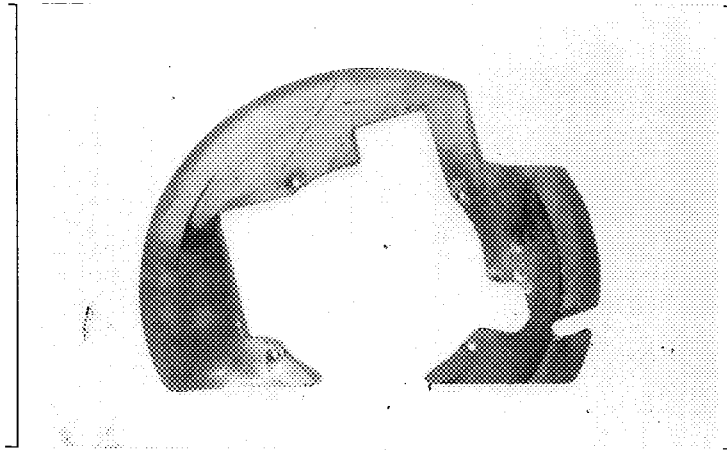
PROTECTION SHIELD FOR DISC
